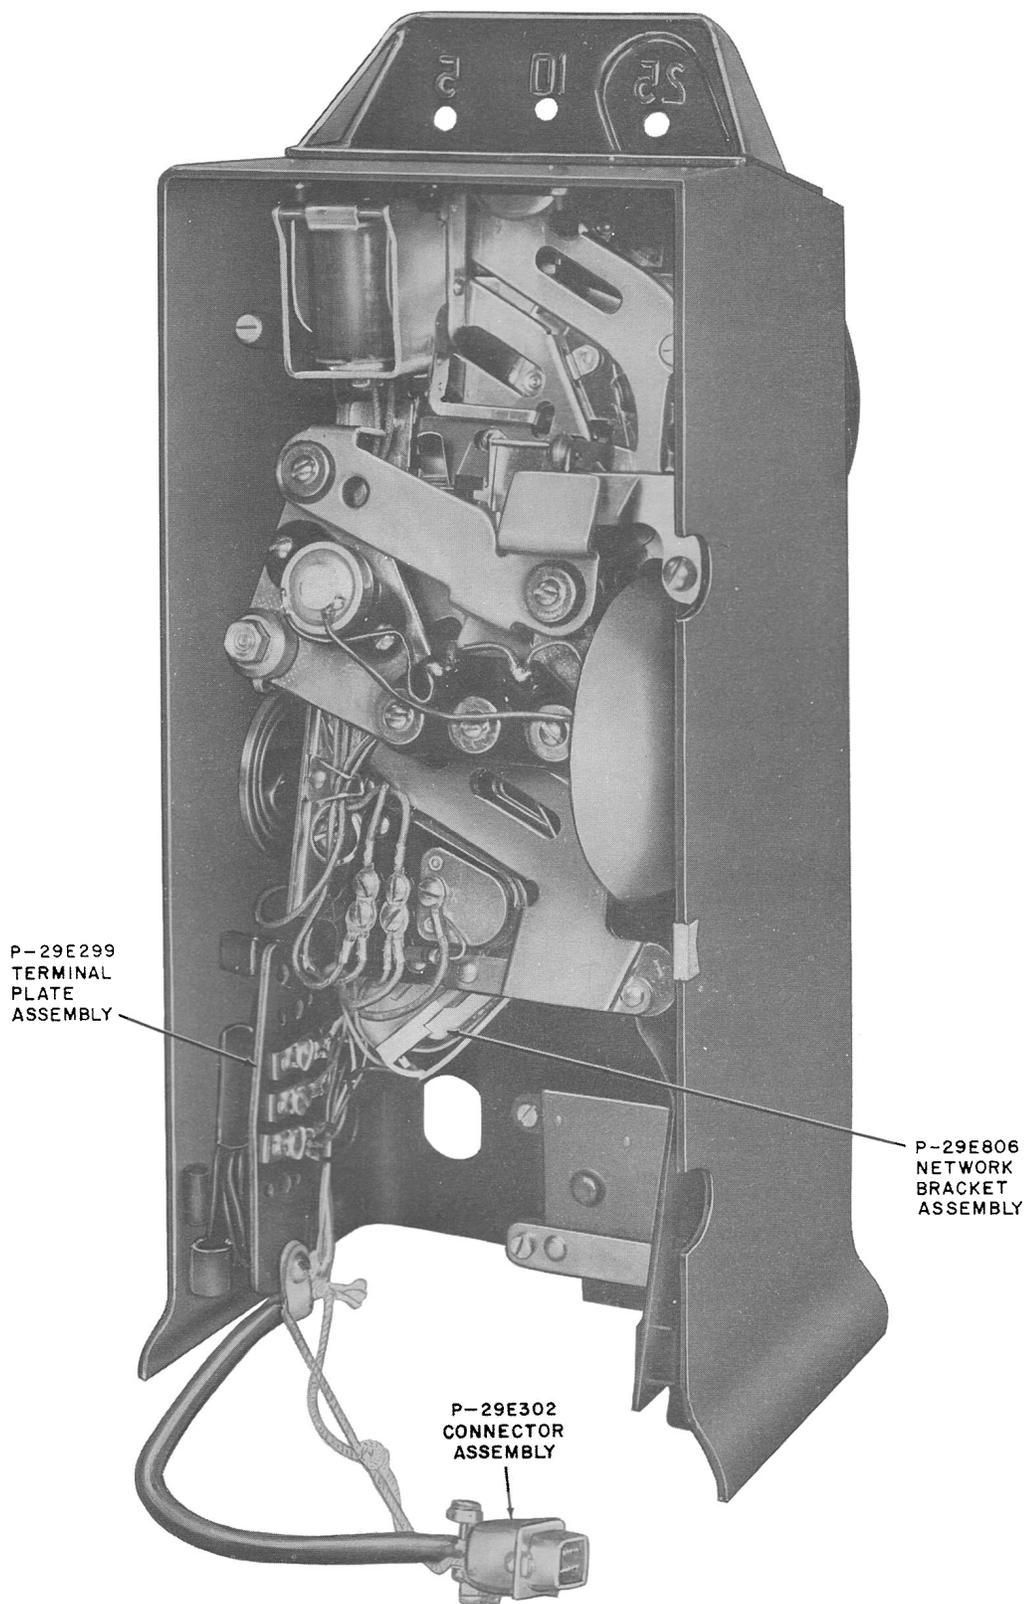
Upper Housing Assembly — 236-Type Coin Collector
